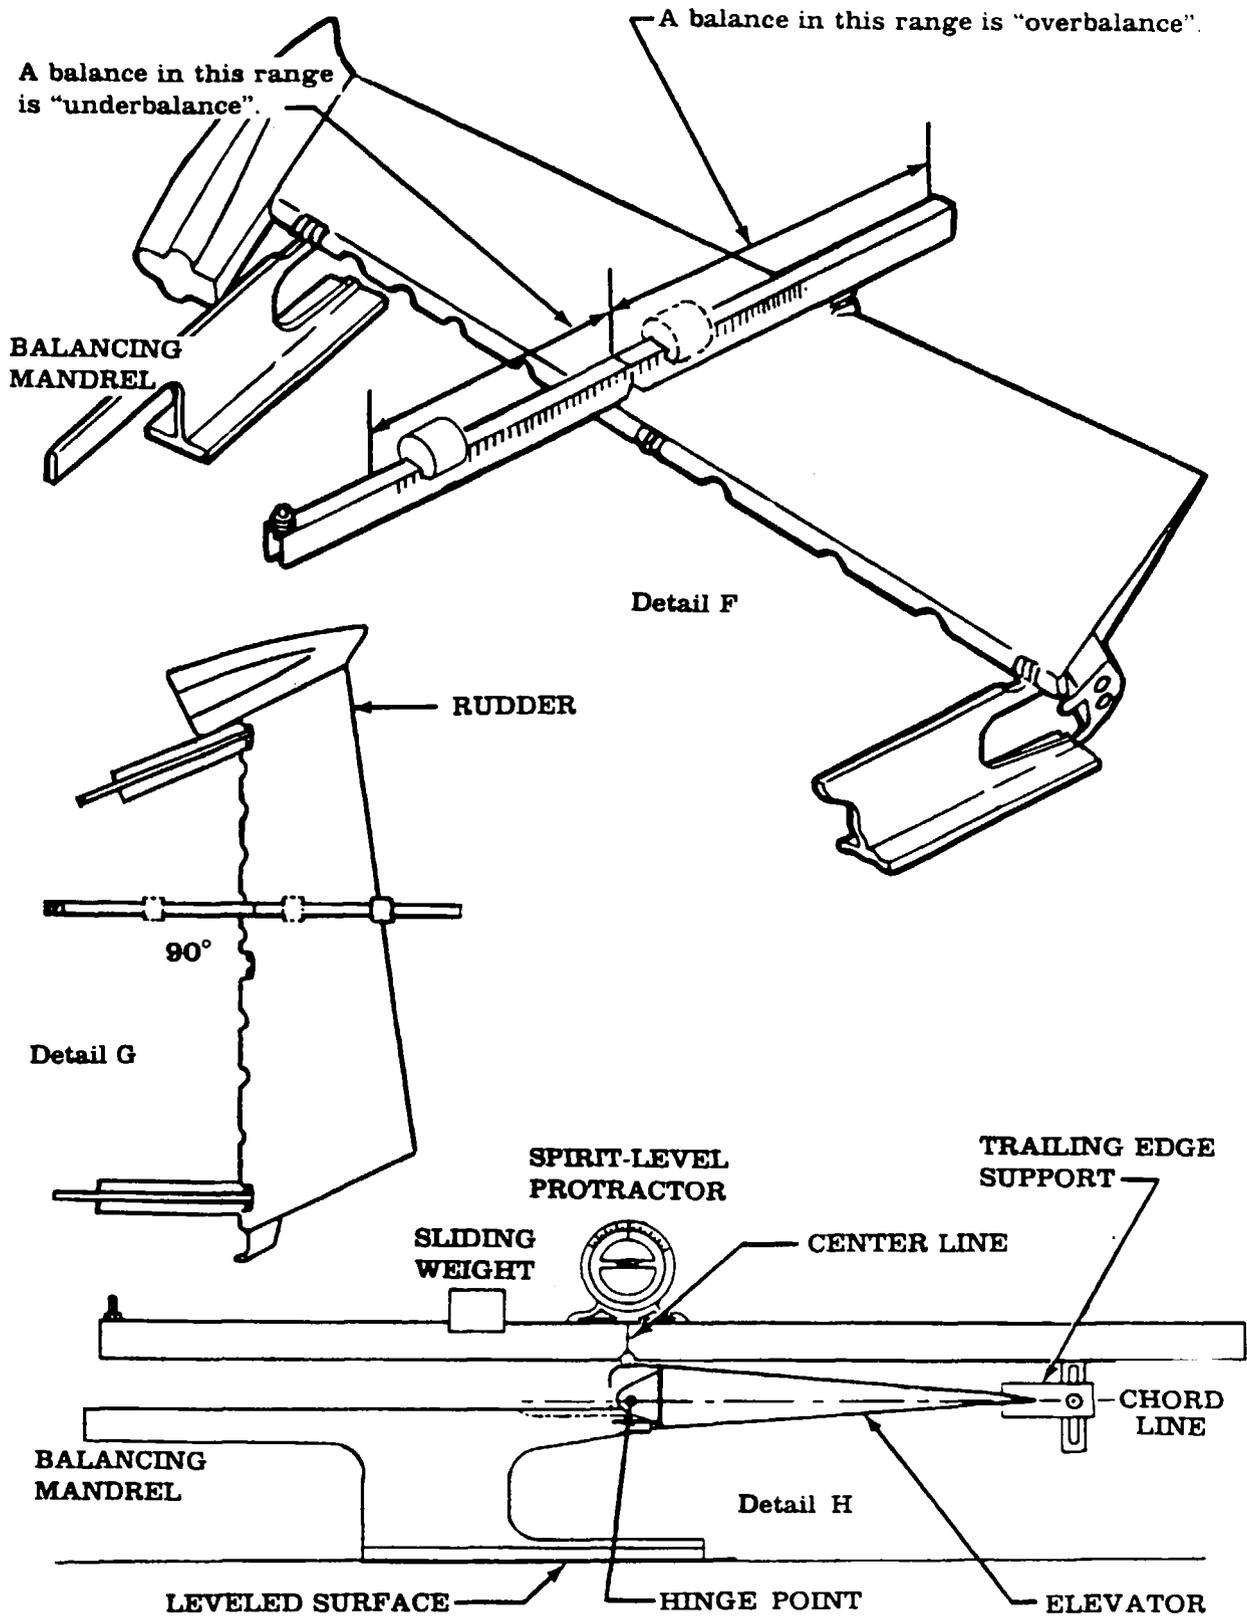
Control Surface Balancing (Sheet 3 of 5)
